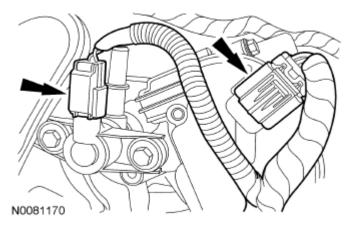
Locating Wiring Harness Retainers Of Intake Manifold Courtesy of FORD MOTOR CO.
